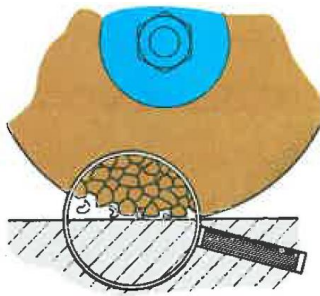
Grinding is a cutting operation, like turning, drilling, milling, or sawing. However, instead of the one, two, or multiple-edge cutting tools used in other applications, grinding employs an abrasive tool composed of thousands of cutting edges.
